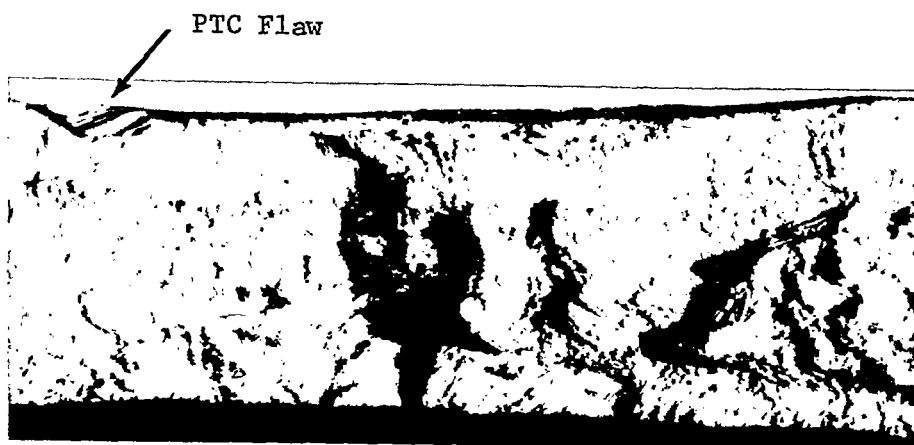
Longitudinal Weld Fracture Faces -2014-T6 Aluminum Vessel Hydroburst at -320°F .
